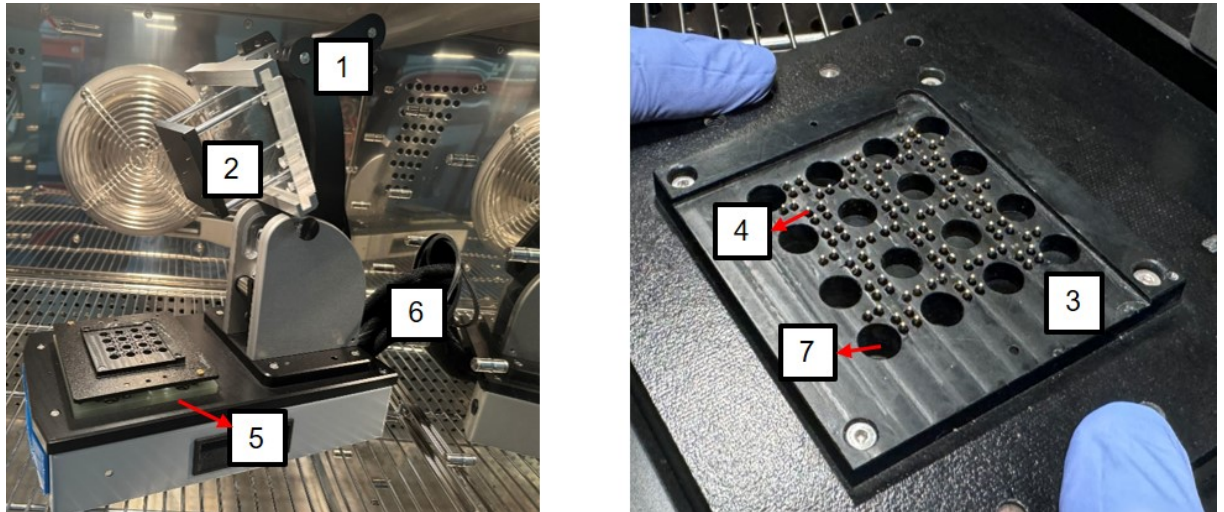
Test adapter with lever (1), test fixture kit which consists of a pressure frame plate (2), a moving plate (3), protruding test probes (4), a probe plate (5), and a connection cable (6) to external measurement equipment. The inlet (7) is for the exposure of test structures to preconditioned air from below (adapted from [207], own publication).
